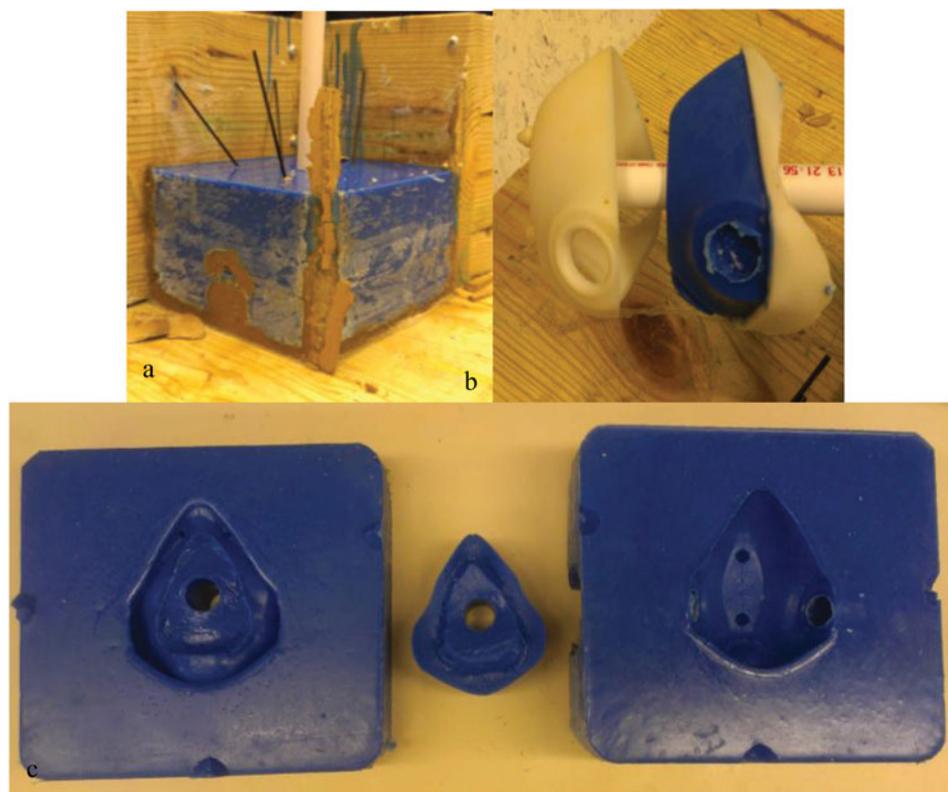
Opening mold (a: removing mold system from box; b: retrieving male mold from facepiece assembly; c: completed mold pieces). (color figure available online).
